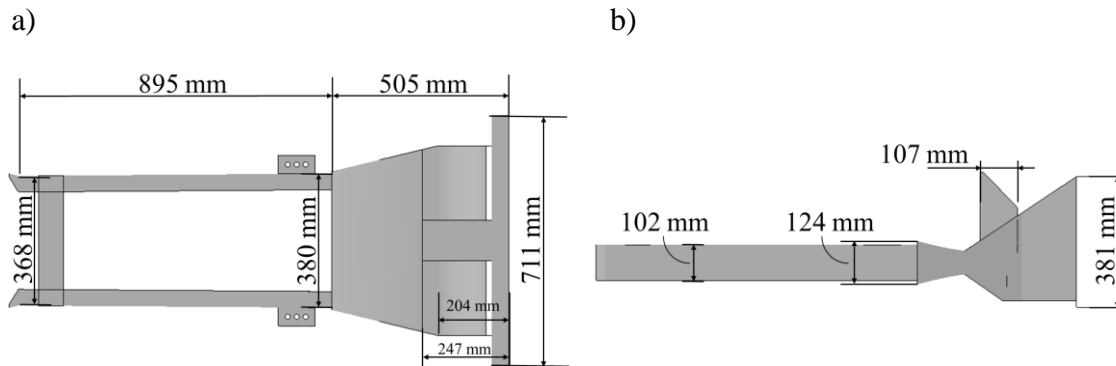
ET-Plus impact head dimensions: a) side view; b) top view
